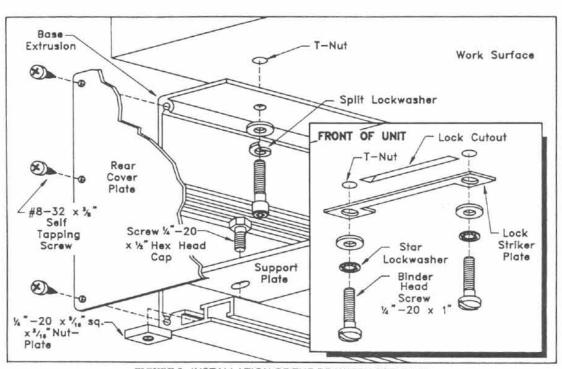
INSTALLATION OF THE DRAWER ASSEMBLY
